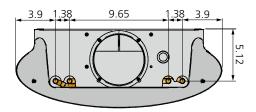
Dimensions ADRIATIC Ellips, end view water connection.
